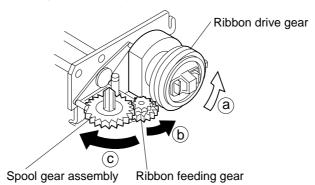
Ribbon Feeding Reduction Gear Assembly
